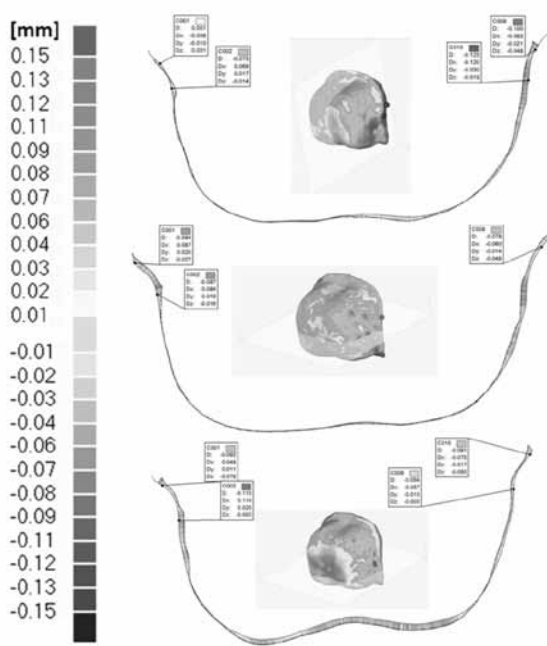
Distribution of step shape reconstruction accuracy deviations in case of frontal section of a molar tooth, using the following technologies: a) casting, b) milling, c) SLM
